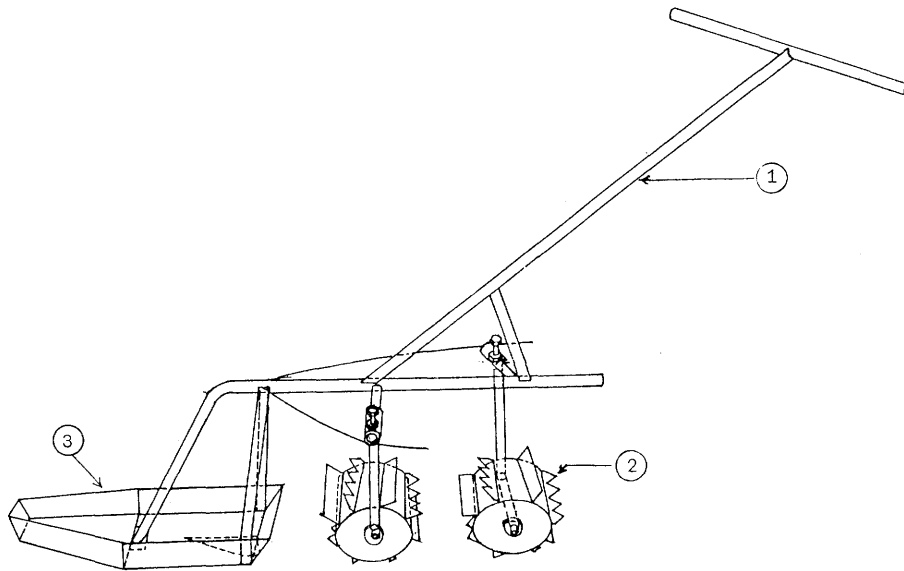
Rotary weeder cylindrical roller type (scale 1 : 10) (1) Frame (2) Weeder roller (3) Ski.
